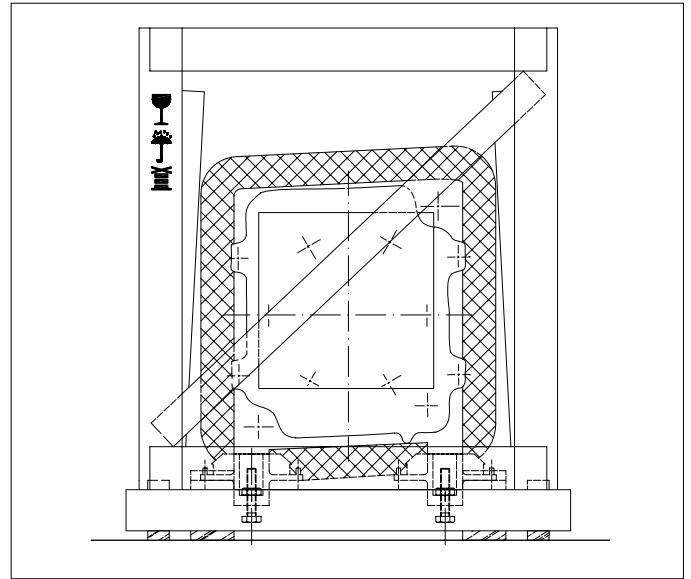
The boiler completely assembled in a crate and on a pallet.
